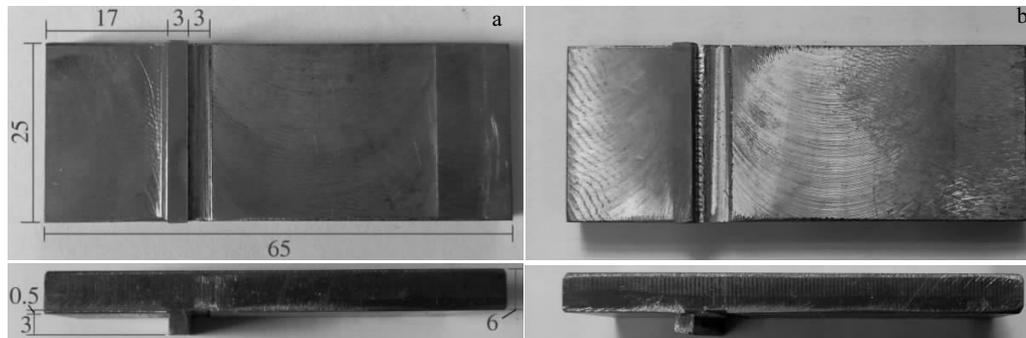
Shear test specimen and its geometric dimensions: (a) before shear test and (b) after shear test
